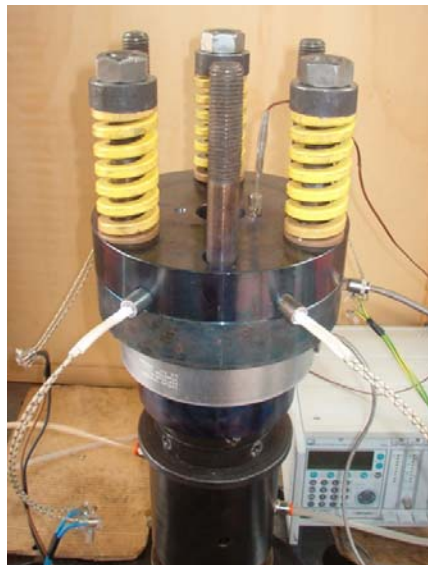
Equipment for deep drawing tests mounted on the testing machine.
